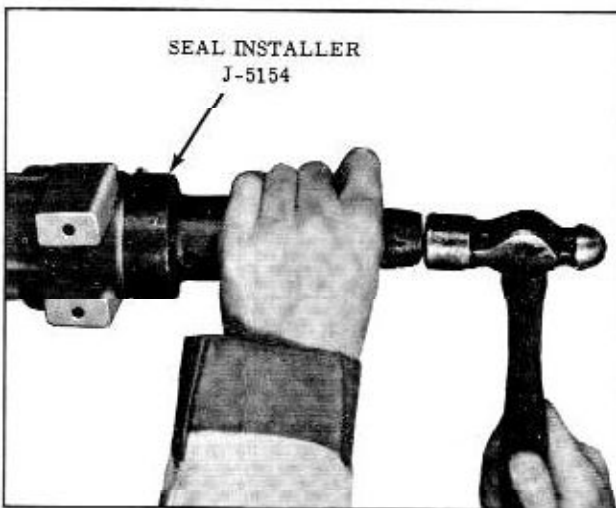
Installing Rear Bearing Retainer Oil Seal
